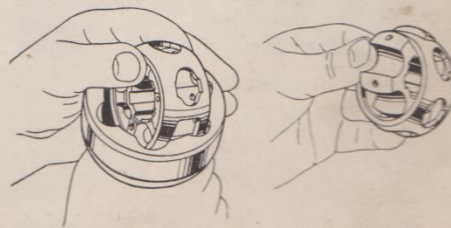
REMOVING CAGE—RZEPPA JOINT
